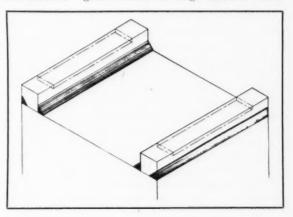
Drawing showing application of square steel stock to provide support along one entire side of jig.
